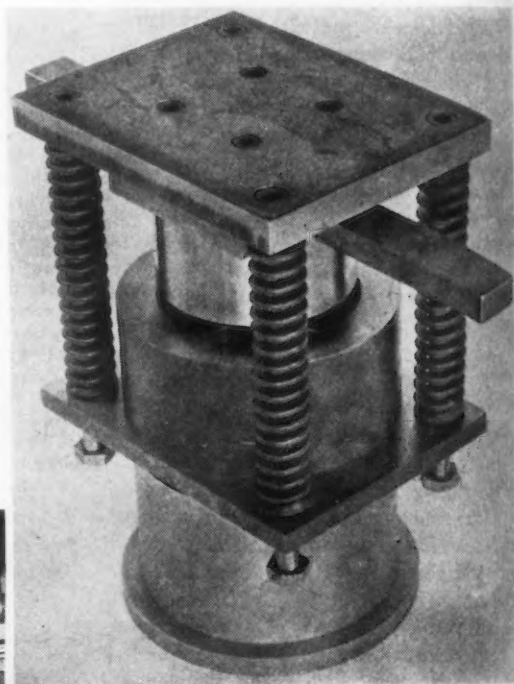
Assembled transfer mold as it appeared assembled and ready for clamping into the molding press.
